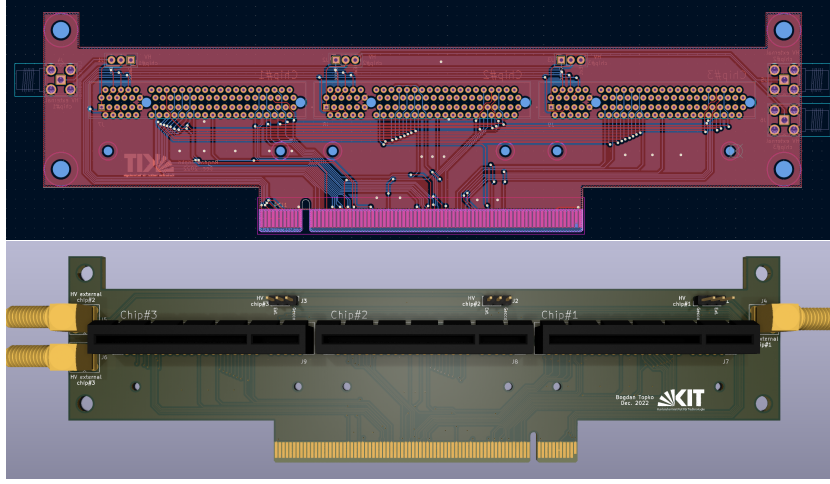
Multi-carrier board PCB layout (top) and its 3D render (bottom).
